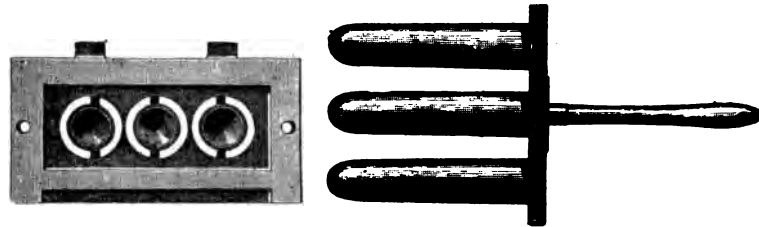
Die for Pipes. Fig. 582.—Fork-shaped Mandrel for handling Pipes.
